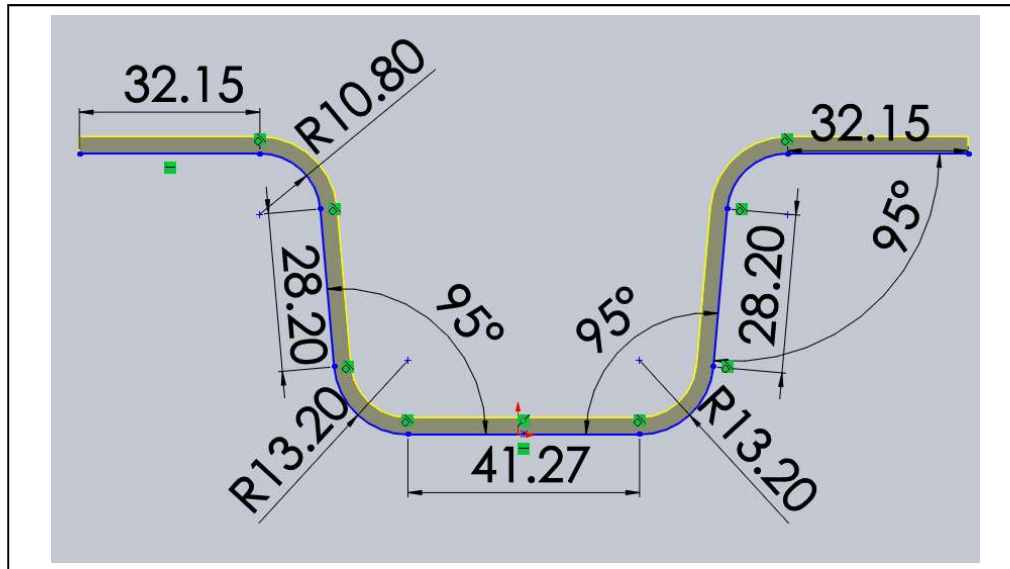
Composite Hat Channel Cross-sectional Dimensions
